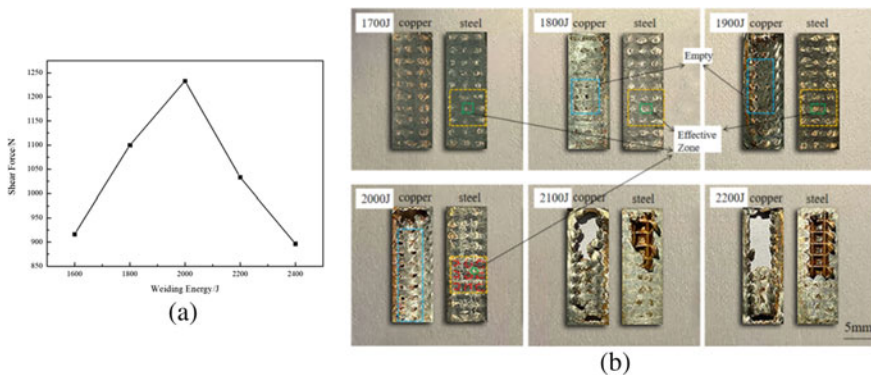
a The shear force of joints at different welding energy, b Macro-morphology of fracture surface under different welding energy
